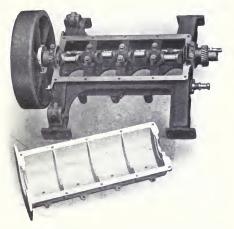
Engine Base, Showing Support Piece Separate from Crank-Case, as Formerly Used by Premier Motor Manufacturing Company, Indianapolis, Ind. Case and Support are Now Made Integral.
